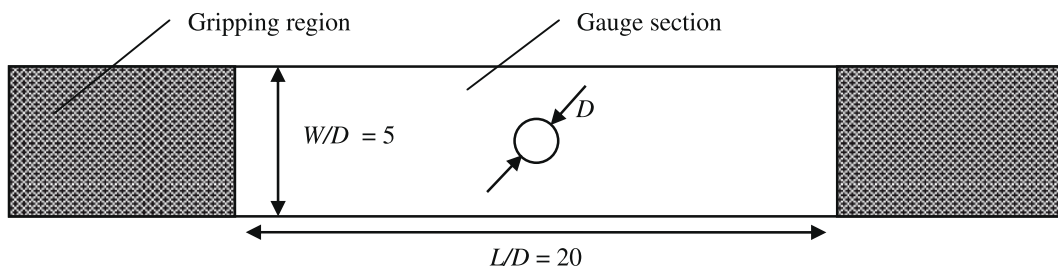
Open hole specimen geometry. - Reproduced from [216].
